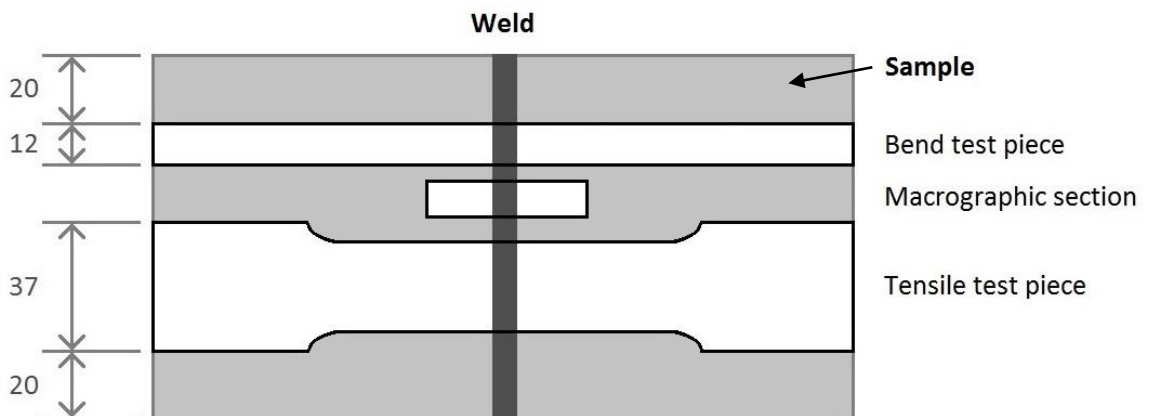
Butt weld test piece assembly used in the study. The gray plate represents the manufactured and/or sheet metal part from which the test pieces were cut off after welding. The weld is situated in the middle.
